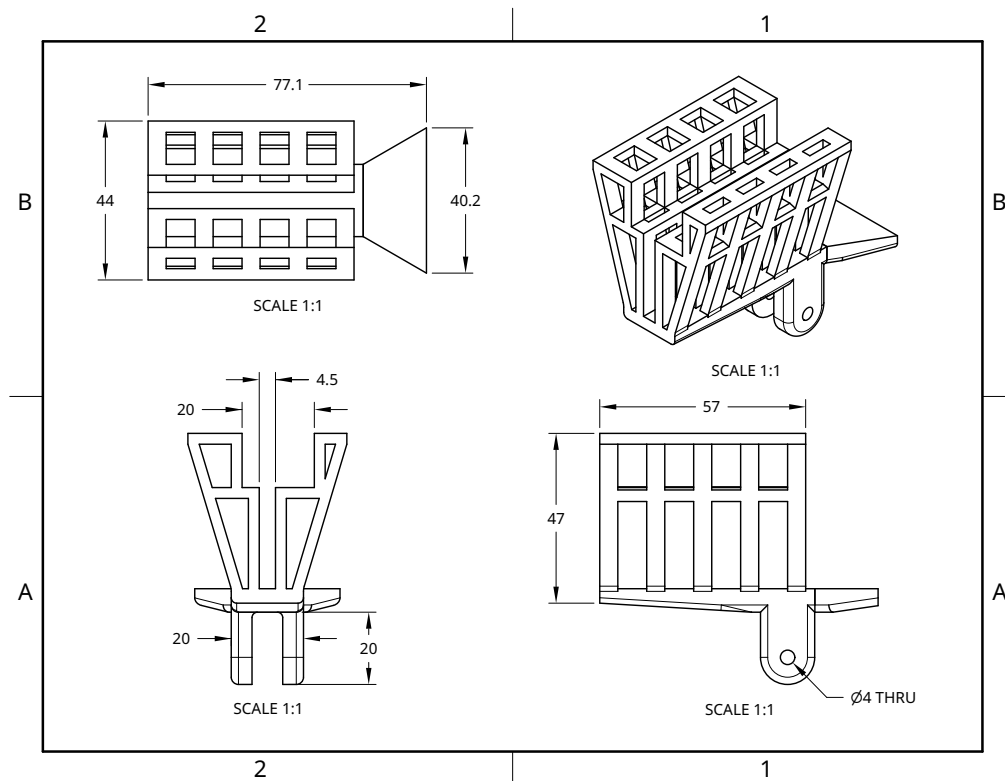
CAD drawing of the cage component of the catapult launcher. All quantities are given in millimetres.
